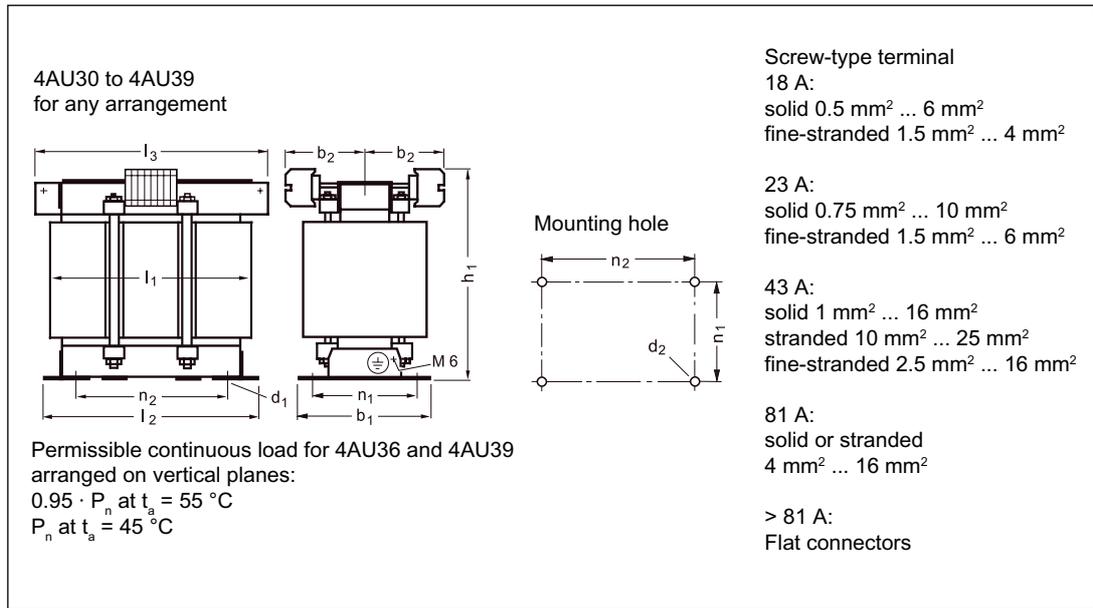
Dimension drawing: 4AU30 to 4AU39
